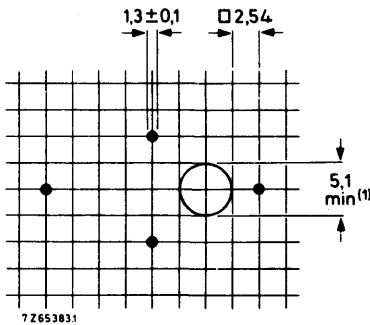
Hole pattern for mounting on a printed-wiring board.
